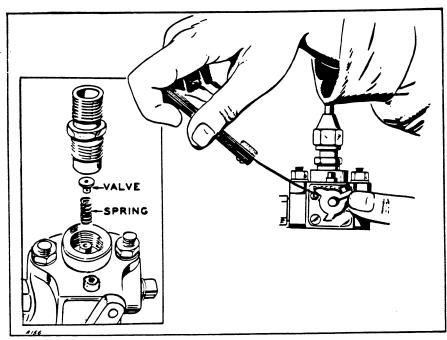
ADJUSTING THE THROTTLE LEVER STOP
